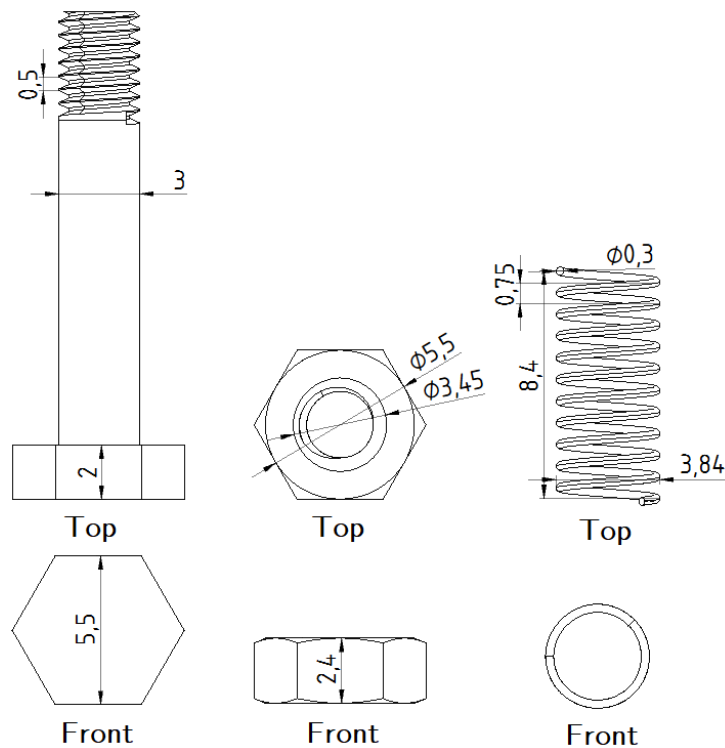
Technical drawing of the improved bolt, other parts are unchanged. Units of length are in millimeters.
